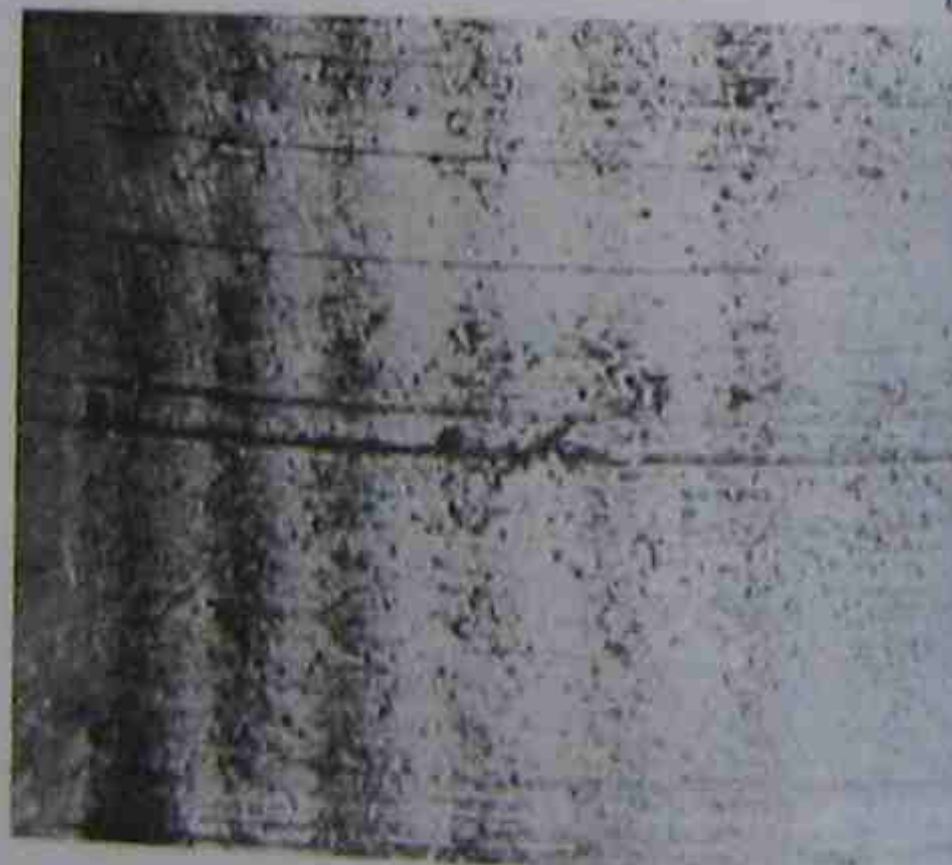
Pitting of bearing surface due to stray electric current.
